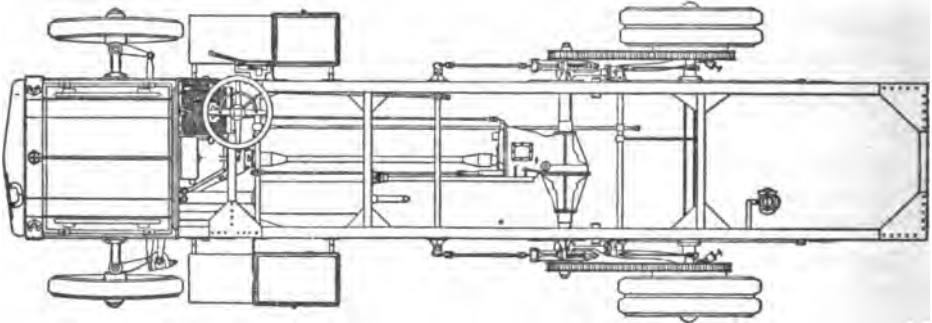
Top view of a double chain driven truck. Rear axle is called the "dead" type because it does not revolve. Formerly employed by the Packard Motor Car Co.
